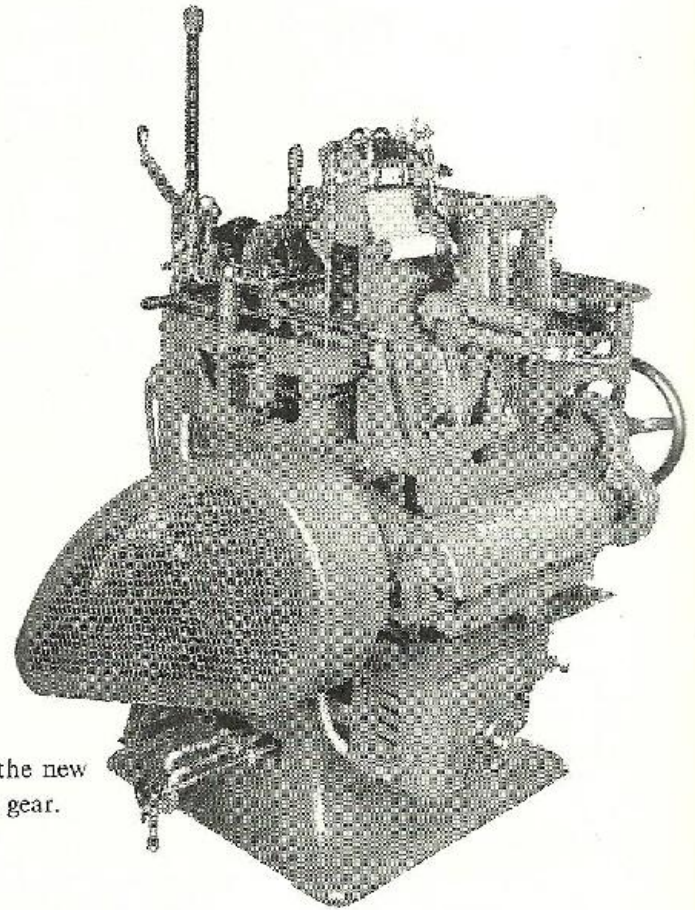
(right): showing the new BELT GUARD and the new and more convenient position of the motor switch gear.
